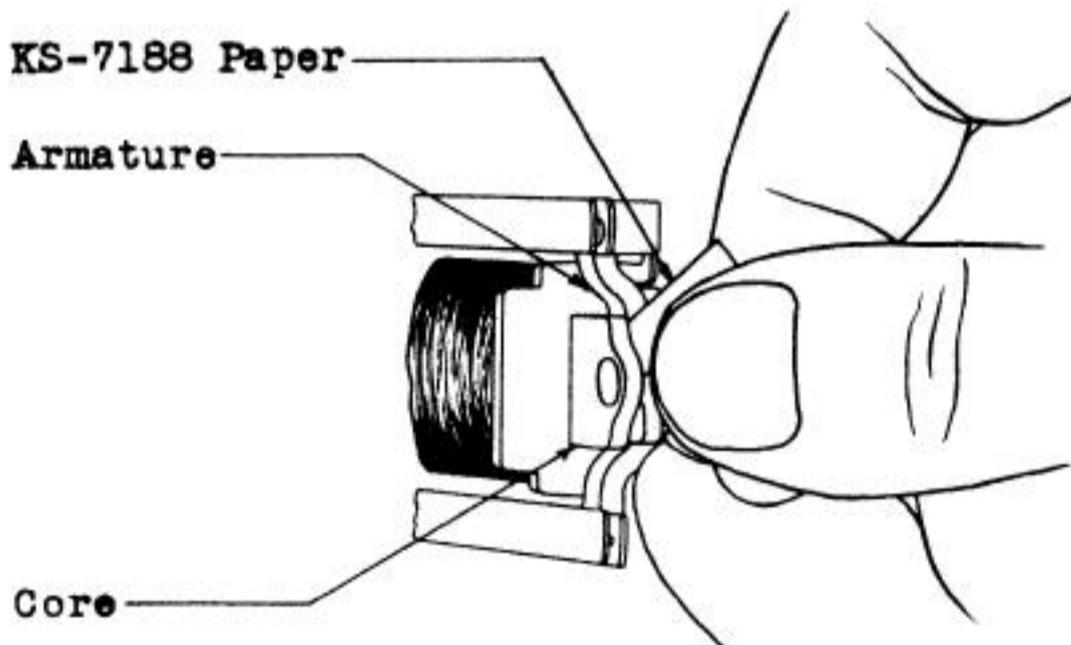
Method of Cleaning Armature and Core on A, E, F, H, R, T and AB Type Relays
